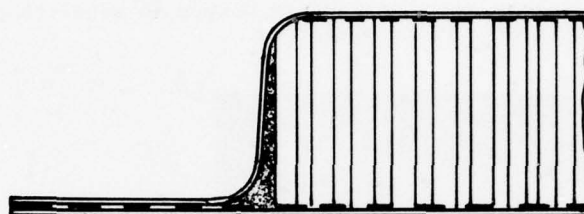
Sandwich panel of which one skin is a pressformed component in which the edge members and the inner face are integrated.
